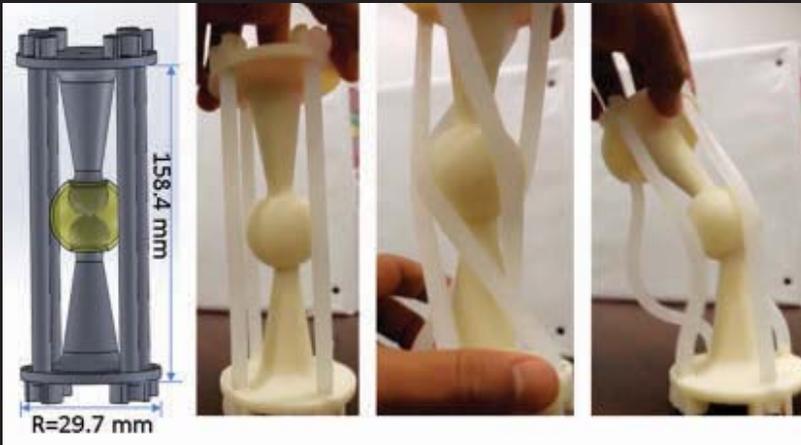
3-D printed ball and socket joint with silicone elastomer support. CAD design and prototype twisted manually.
